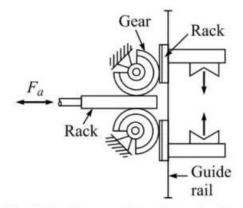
Gear-and-rack method of actuating the gripper.
